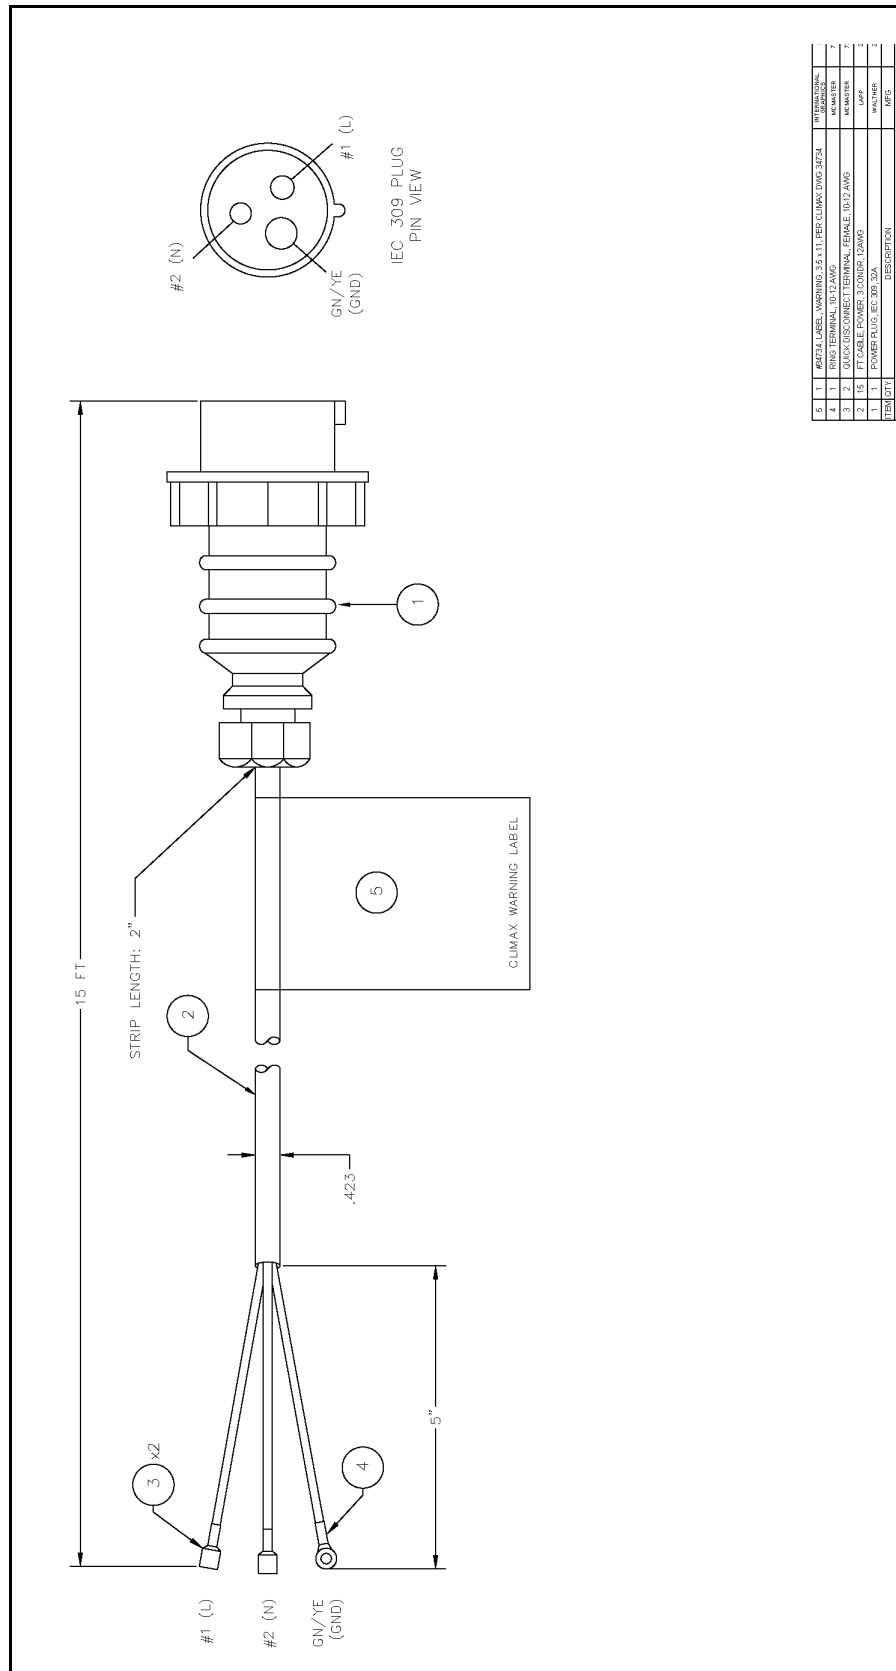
BB5000 EIBENSTOCK POWER CABLE ASSEMBLY 2ND GEN 120V CE 332P4W PIN/SLEEVE PLUG (P/N 88653 E00173)
